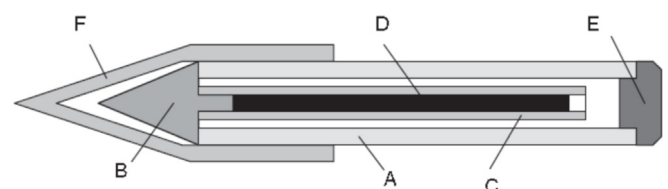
Assembly drawing of Bourjault's ballpoint.
